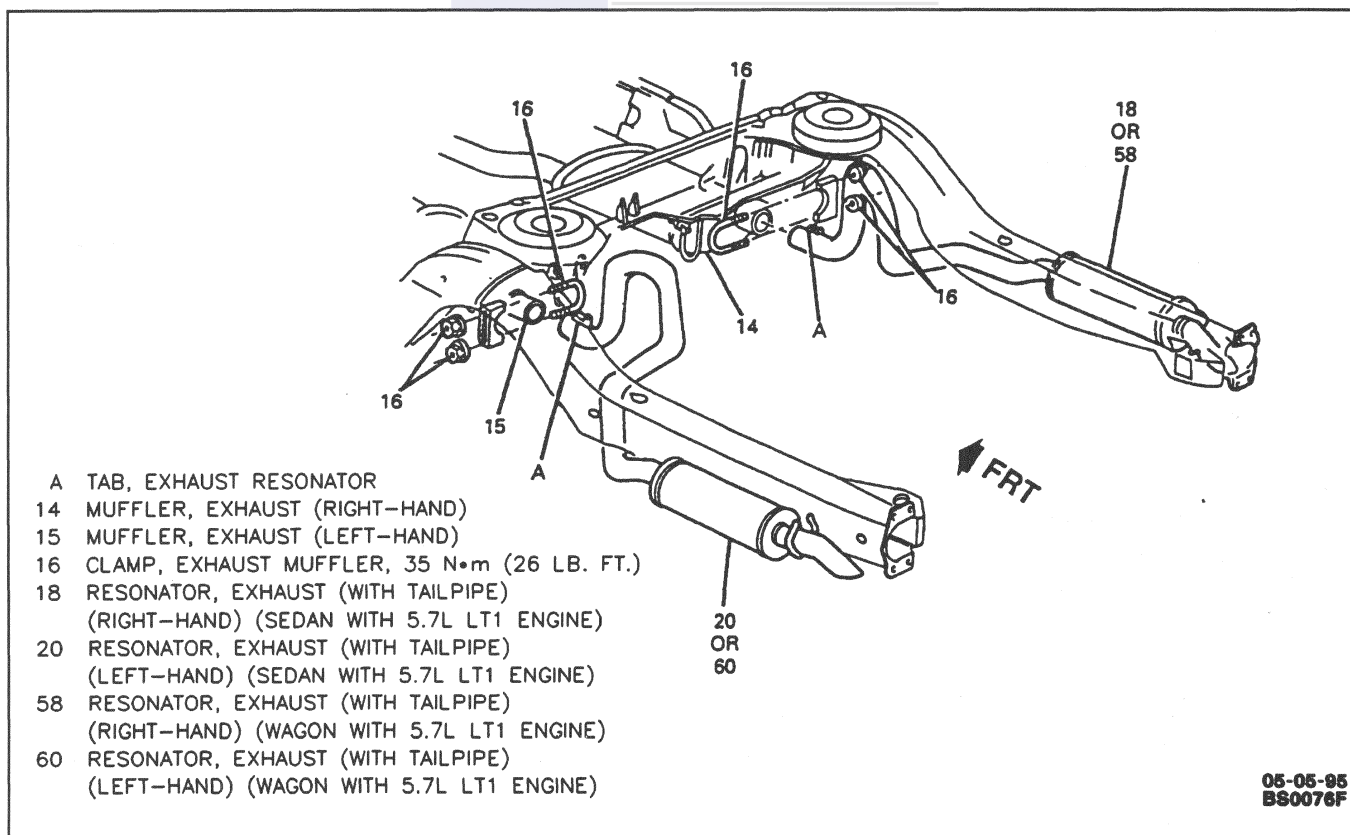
Exhaust System Rear Portion (5.7L LT1 Engine)
